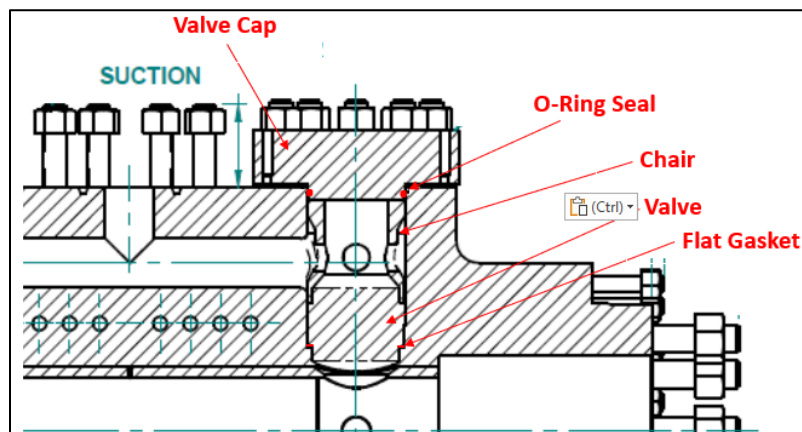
Modern Valve Assembly Retained by O-Ring Sealed Valve Caps
